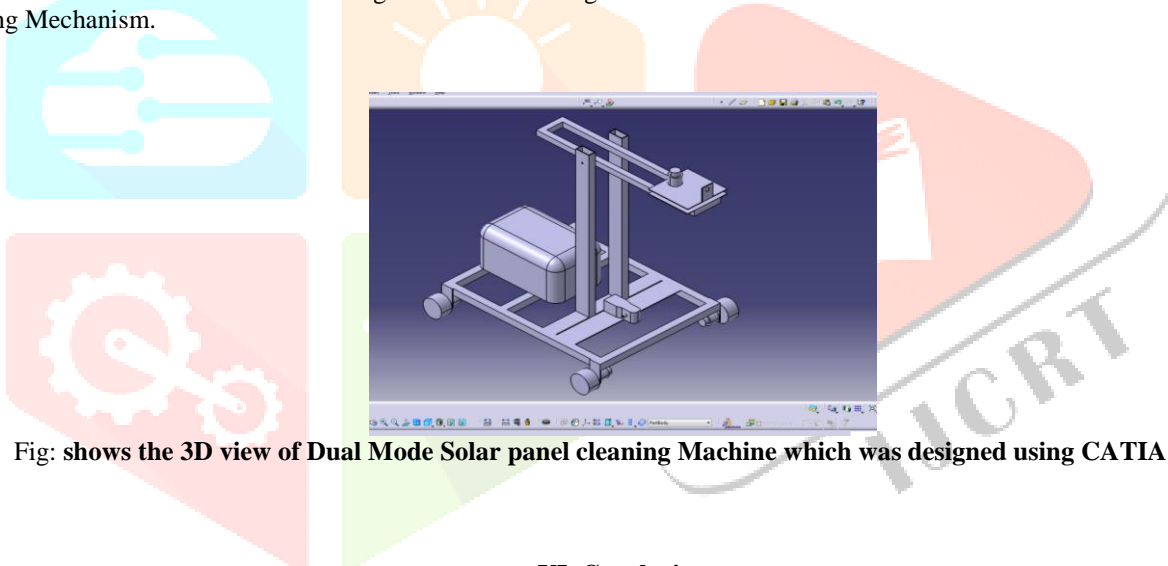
D view of Dual Mode Solar panel cleaning Machine which was designed using CATIA.
